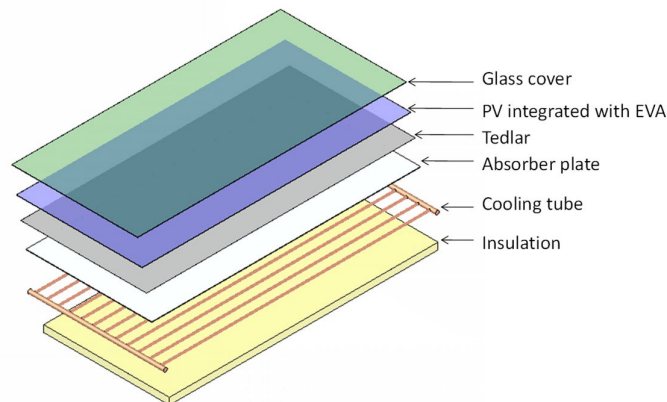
Exploded view of PV/T collector with sheet and tube heat exchanger.
